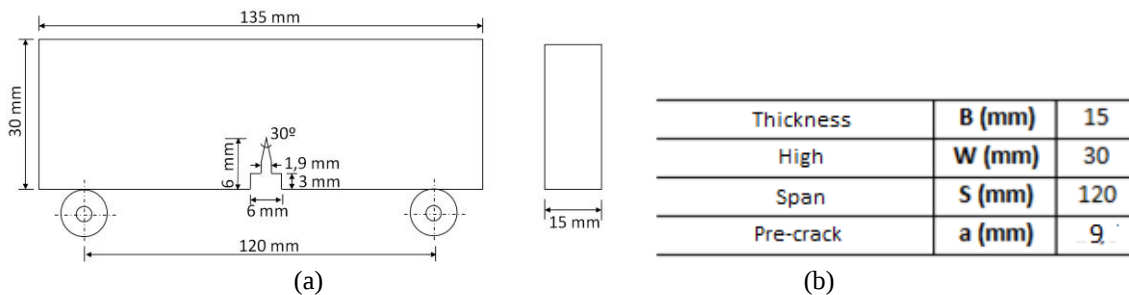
(a) Schematic of the specimens for fatigue crack propagation testing and (b) their dimensions according to ASTM E647, 2008.
